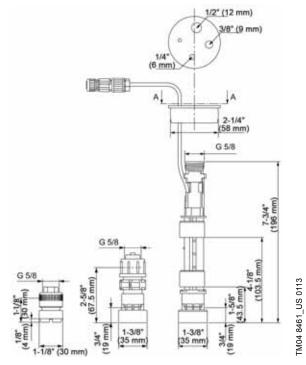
Left: stainless-steel foot valve; center and right: PE or PVDF foot valve, dimensions
